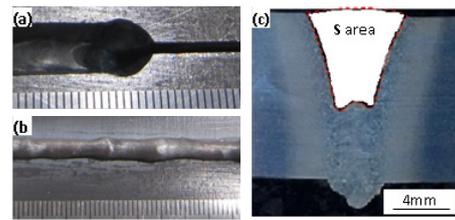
Weld bead and cross section of PAW welding. (a) Top surface; (b) Bottom surface and (c) Cross section.
